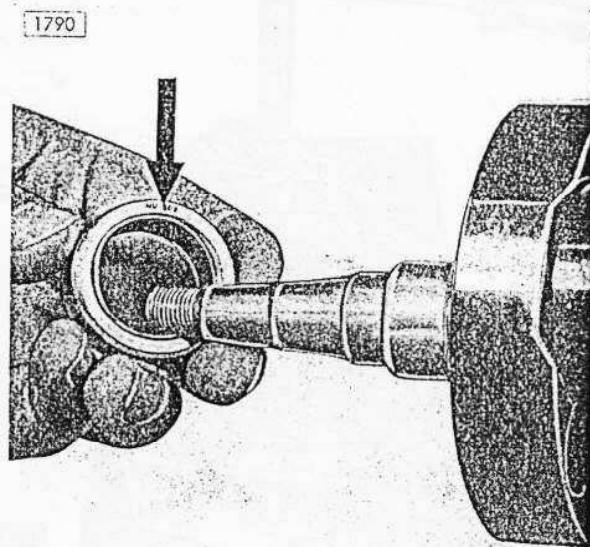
Crankshaft with ring and inner ring of roller bearing
